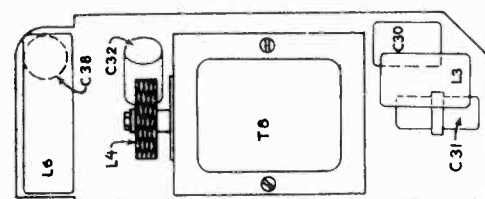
PARTS LAYOUT, BOTTOM VIEW
